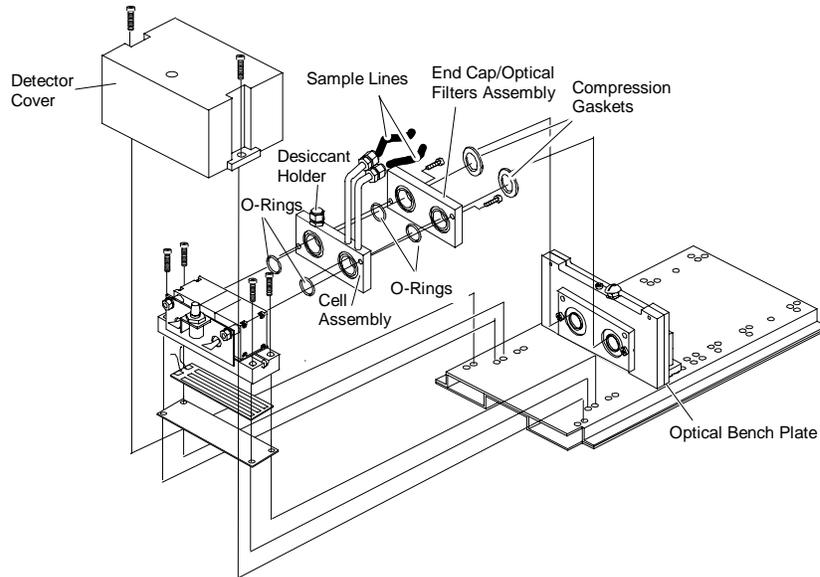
OPTICAL BENCH ASSEMBLY
